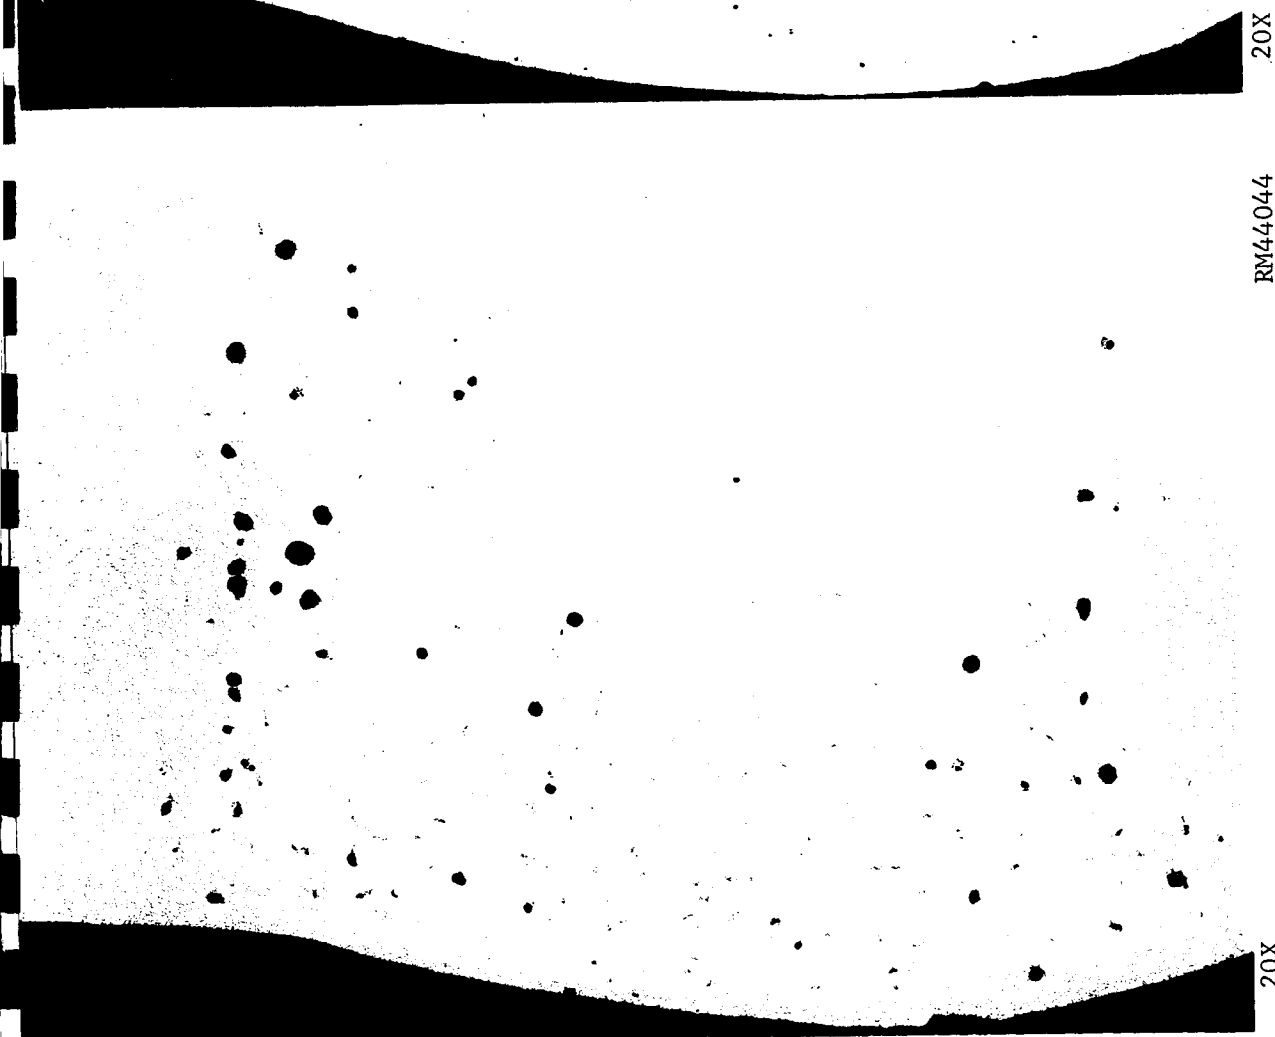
TYPICAL CROSS SECTIONS OF WELDS WITH X2319, TYPE 6 FILLER WIRE
